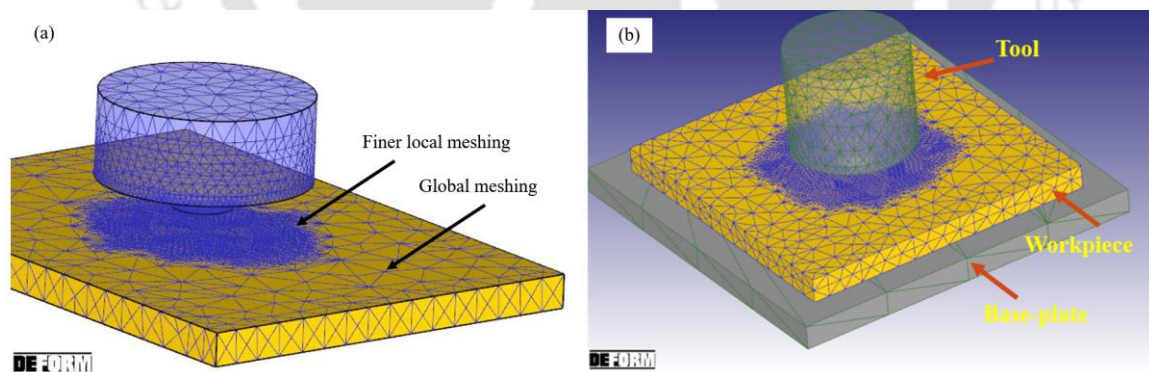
DEFORM-3D simulation: (a) local and global meshing (b) tool, workpiece and baseplate
